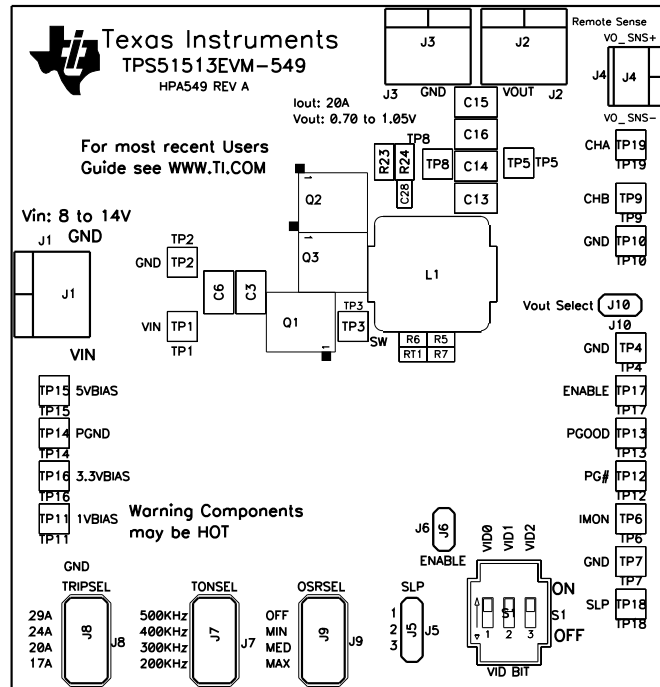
TPS51513EVM-549 Top Layer Assembly Drawing (Top View)
